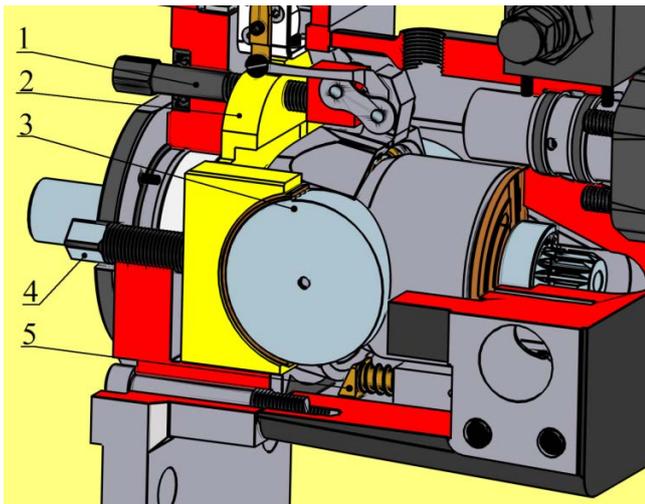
The pump, in which the swash plate may be moved in the direction parallel to the shaft centre line: 1-screw angle adjustment; 2-cradle; 3-swash plate; 4-screw adjustment of the cradle; 5-pressing spring<sup>4</sup>.
